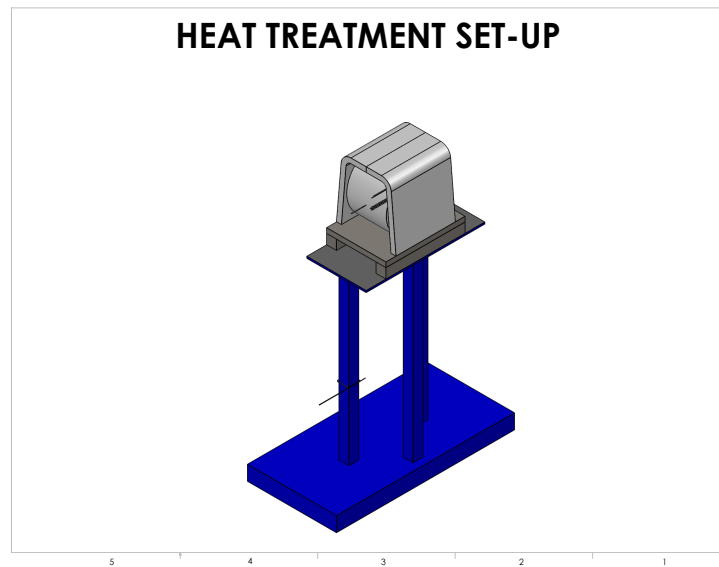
Drawings of Heat-Treatment Set-Up; Page 1
